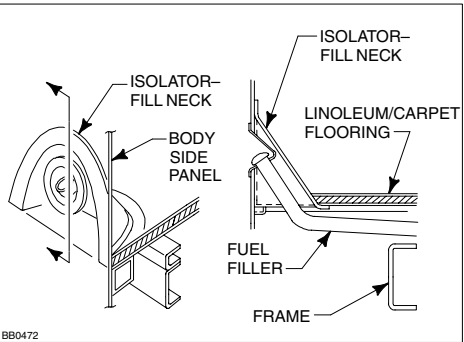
FIGURE A – BODY MOUNTED FUEL FILLER OPENINGS
